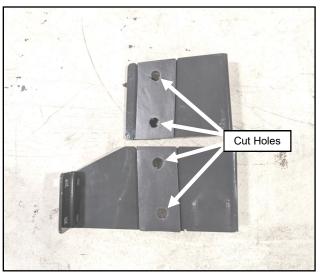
(Cut Out Foam From ROPS Mounting Holes)
